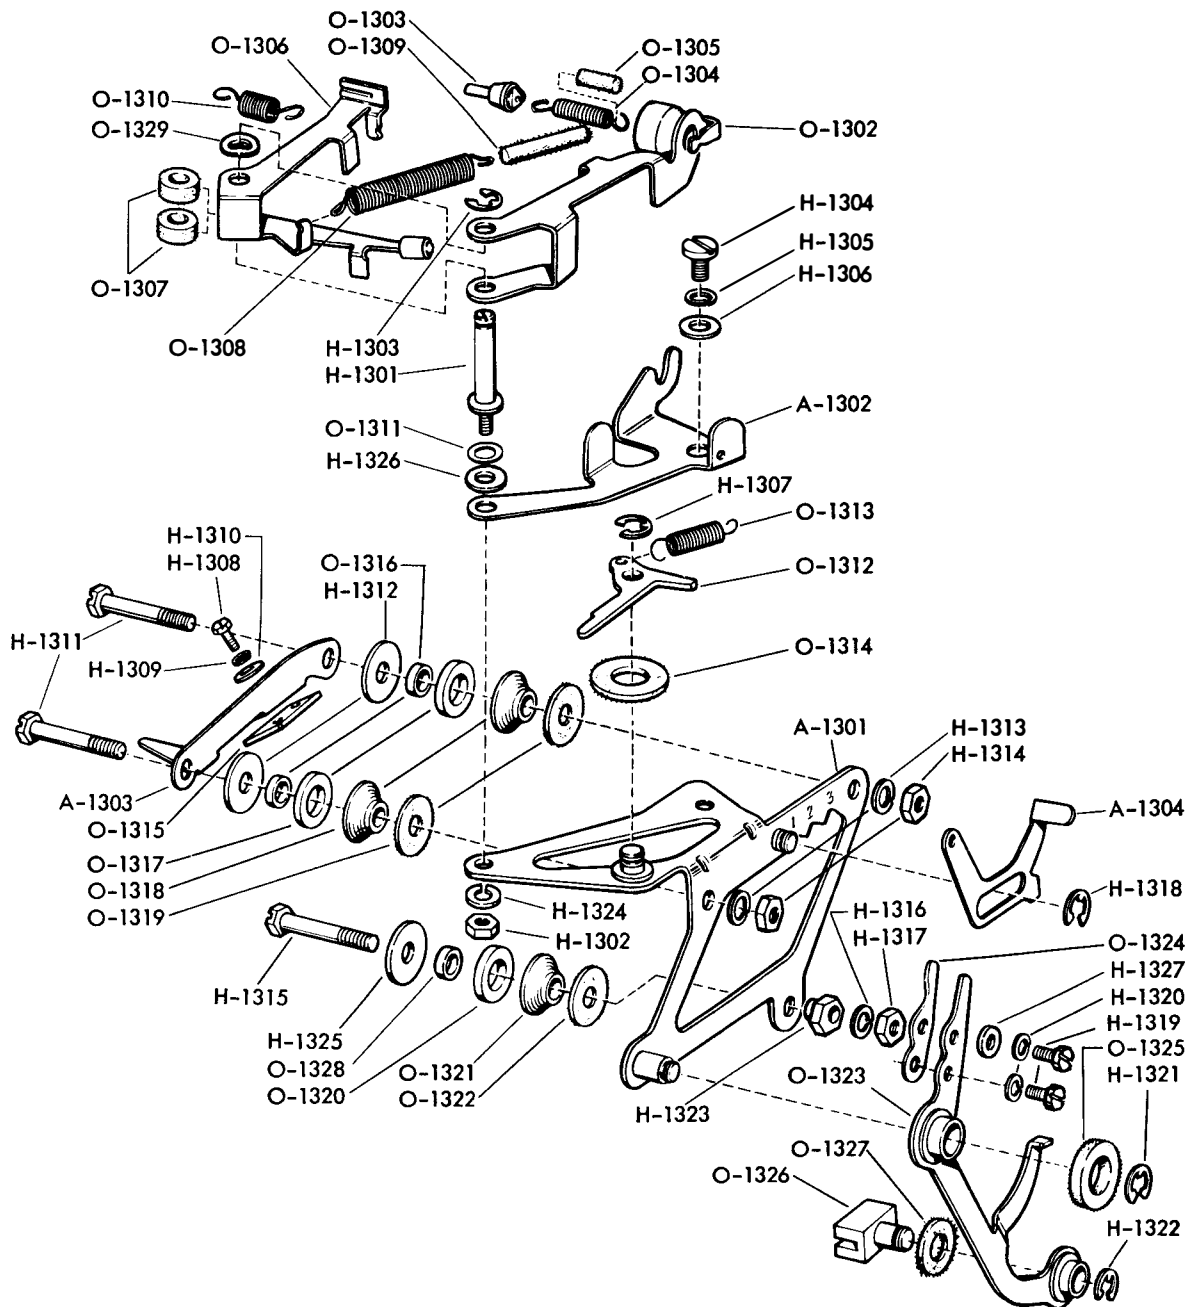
Automatic Typewriter, Printing Carriage Mechanism
